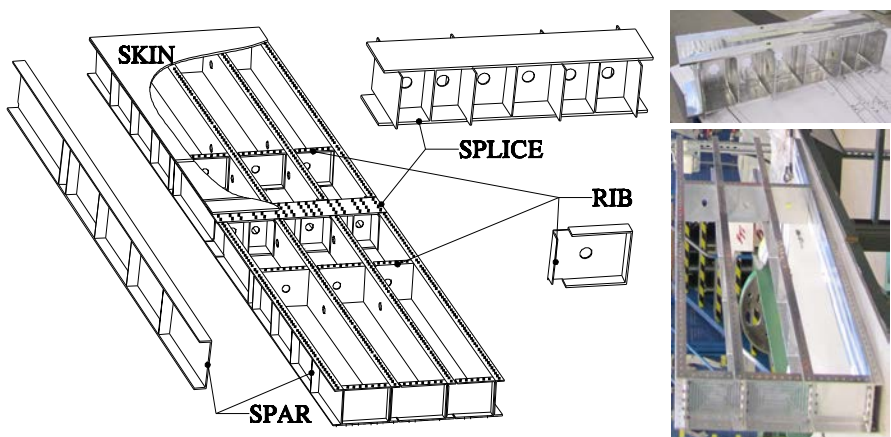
HYBRIS wing box with dimensions 3300x630x150 [mm].
